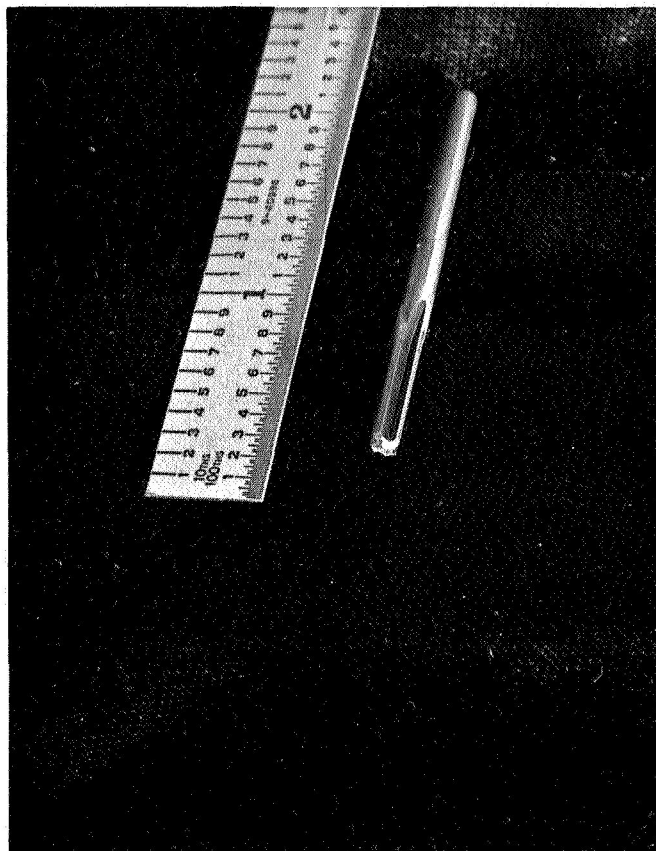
REAMER WITH POSITIVE RADIAL RAKE
